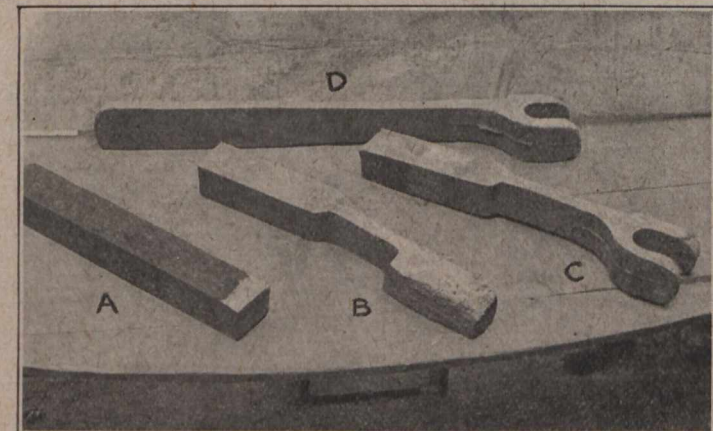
Eccentric Rod Produced on the Forging Machine.
